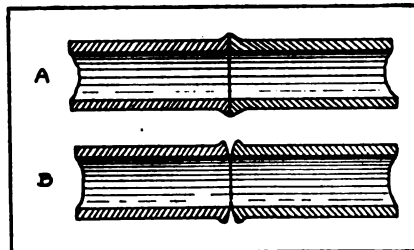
TWO WAYS OF PREPARING TUBING FOR WELDING
